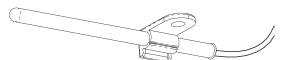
Remote Sensor mounting using the scored break off of the Flexible Probe Bracket (FPB)
